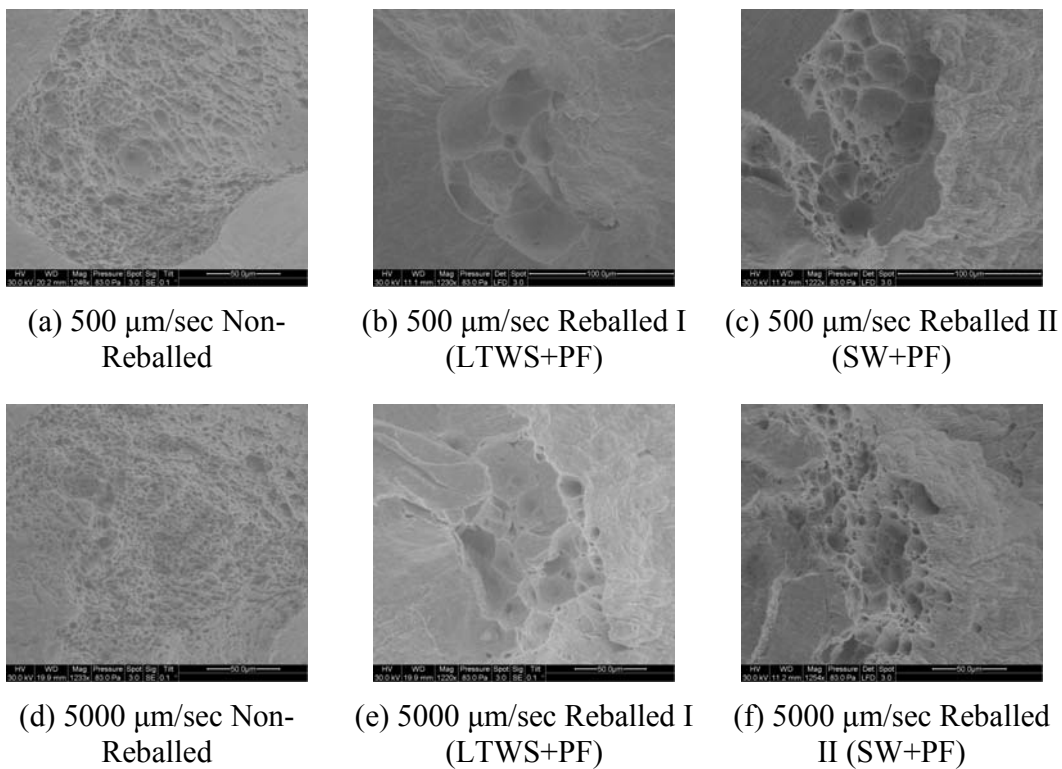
Ball failure fracture surface of non-reballed and reballed components with different speeds (676 I/O BGA)
